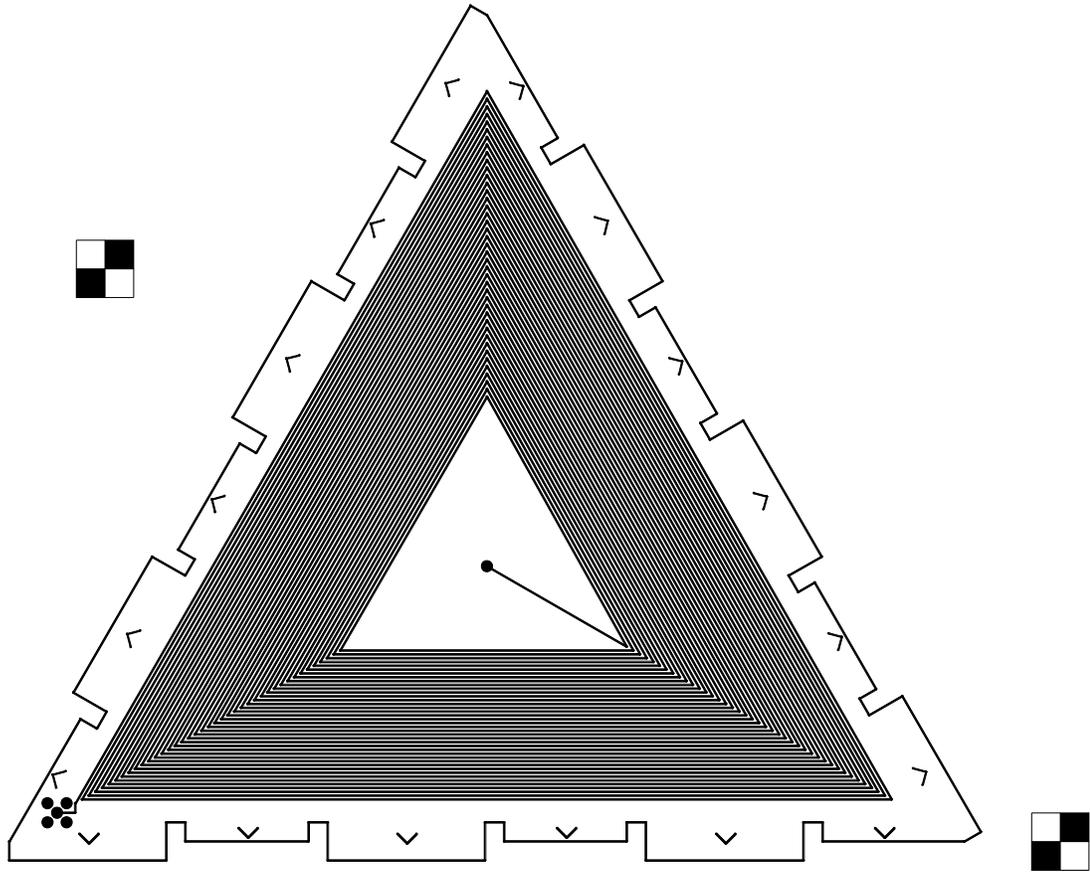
ANT-003 solder-side printed circuit board artwork
